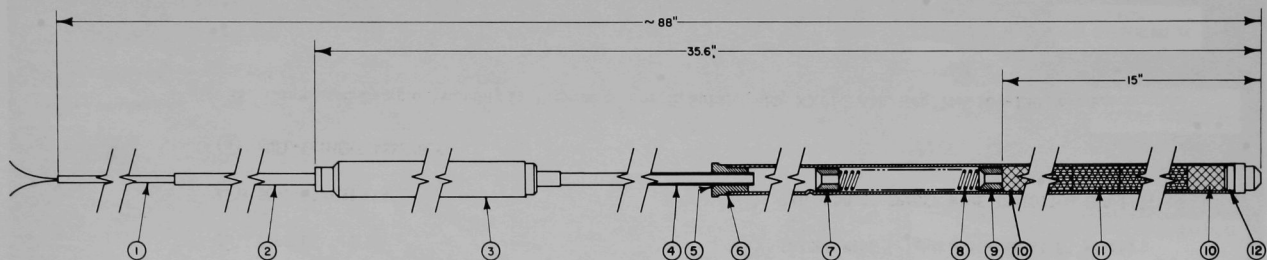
Completed Capsule Assembly for Fuel-centerline Thermocouple in Subassembly XX01. ANL Neg. No. 104-132 Rev. 1.
